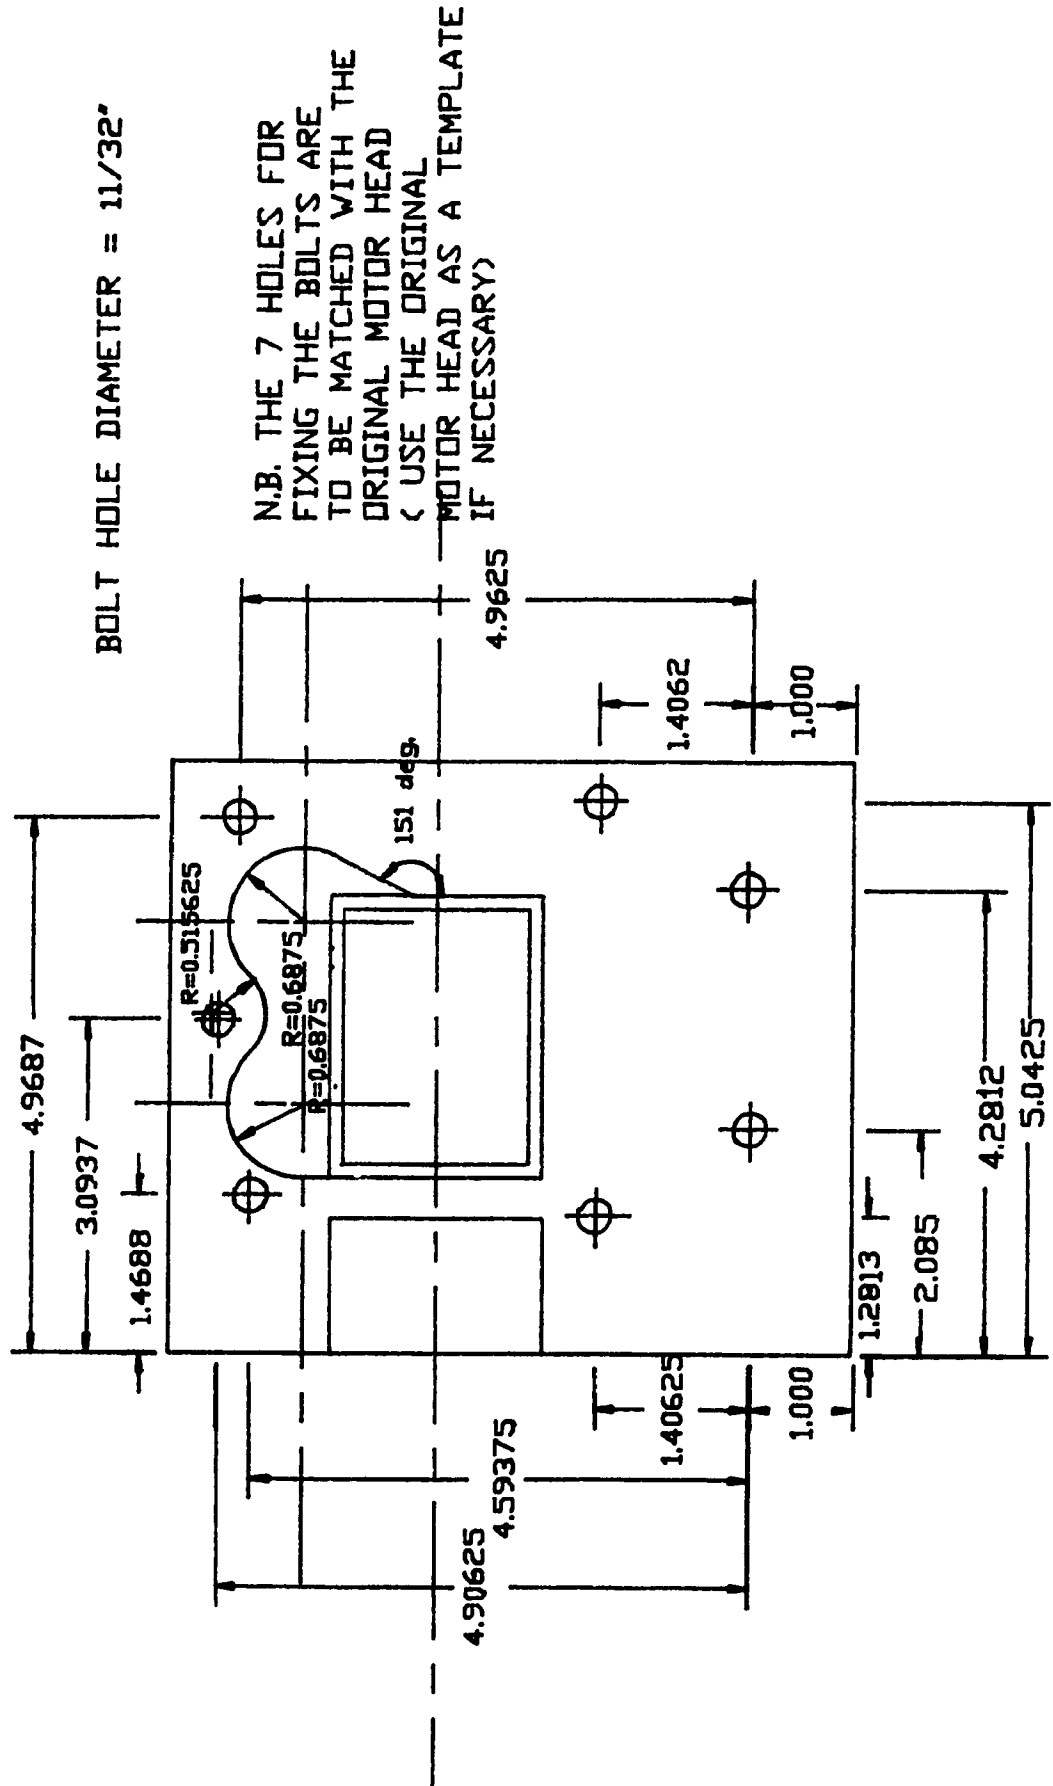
Cylinder Head Bolt Hole Location Drawing
